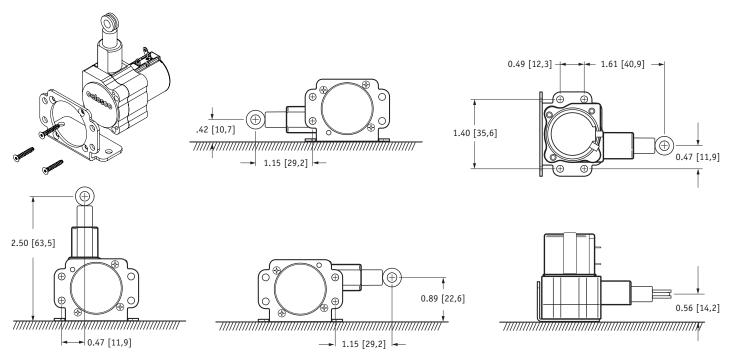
Outline Drawing (w/optional Universal Mounting Bracket):
